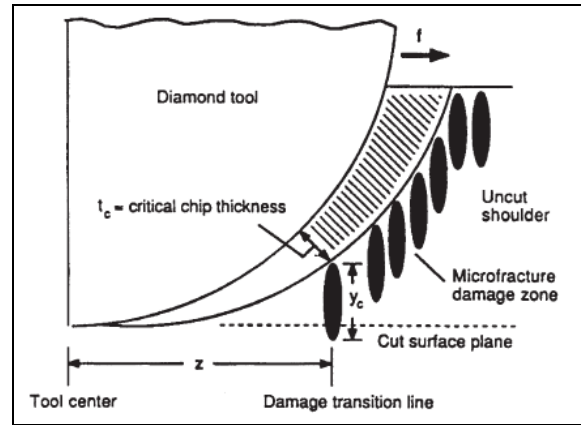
3: Projection of the tool perpendicular to the cutting direction
